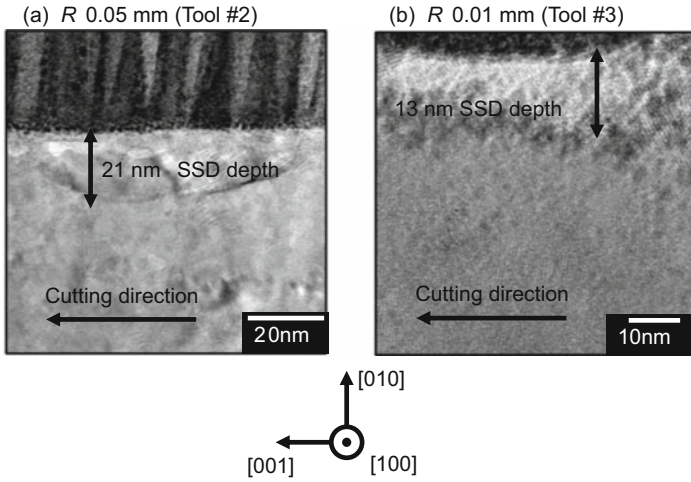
TEM images of machined surface (010) plane machined with a tool of (a) R 0.05 mm and (b) R 0.01 mm
